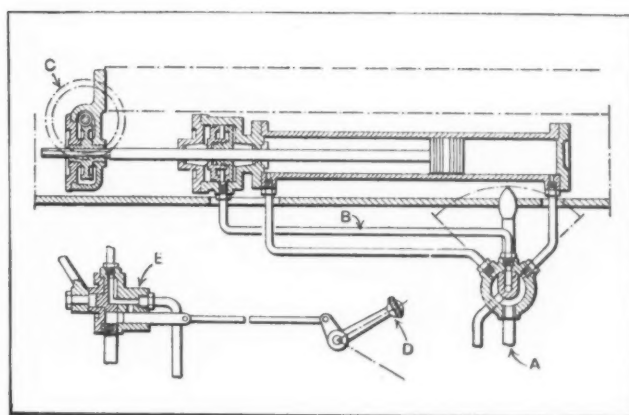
Hydraulic Power and Hand Traverse Arrangements for Table of Jig-boring Machine
